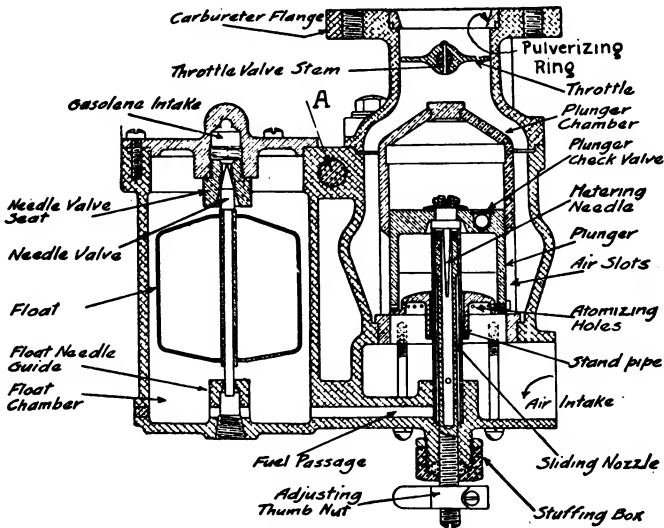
Section through Newcomb Model "E" Air-Heated Type Carburetor
